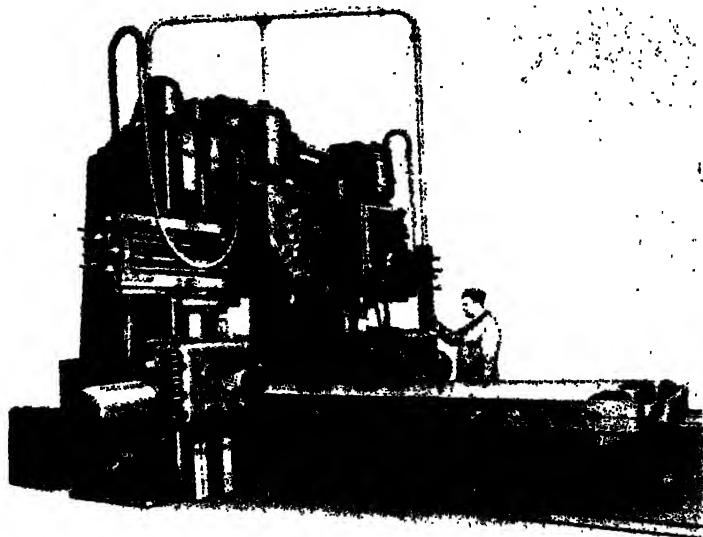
Planer-type milling machine. (Gidding & Lewis)
